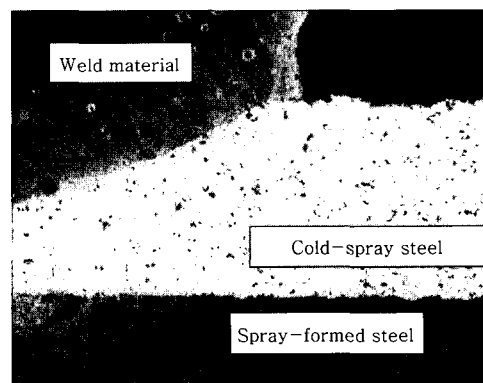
Repair of thermally-sprayed steel tooling material using a cold-sprayed steel intermediate layer on which a conventional weld bead was developed.
